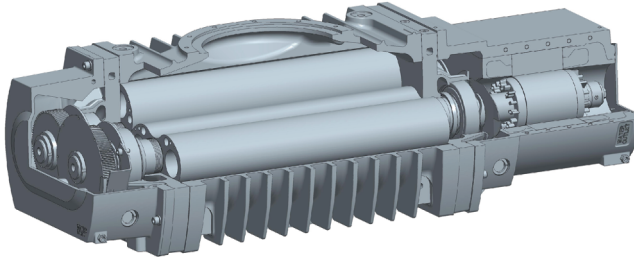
Partial section of a single-stage, hermetically sealed Roots pump RUVAC WH 7000 by *Oerlikon Leybold Vacuum*. Inlet flange size 320 mm, nominal pump speed $10.000 \text{ m}^3 \text{ h}^{-1}$, motor power 11 kW, $4200 \text{ rev min}^{-1}$. With courtesy of *Oerlikon Leybold Vacuum GmbH*.
